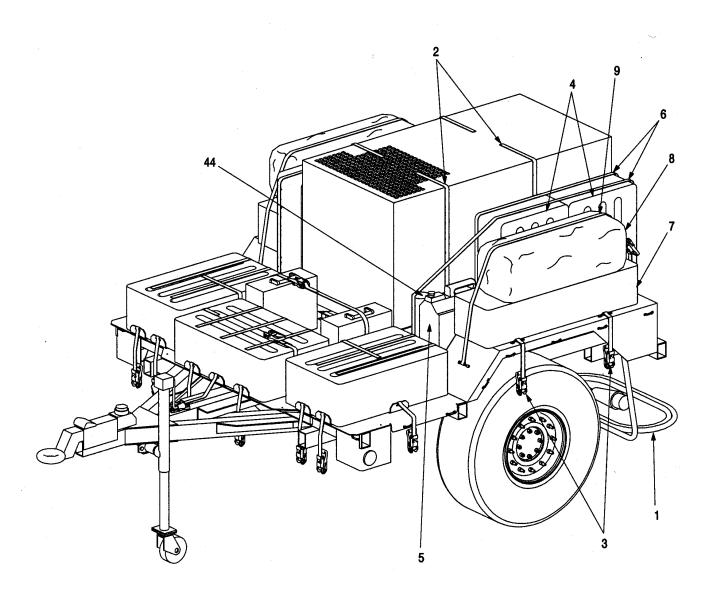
HMT Load Plan (Sheet 1 of 5)
